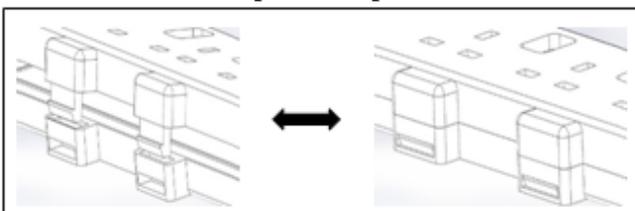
The mechanism of disassembly Design A which is the pin connector
